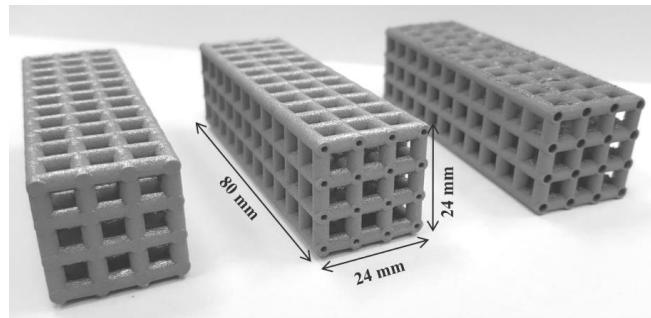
Actual view of titanium inserts printed by using the selective laser melting (SLM) method
